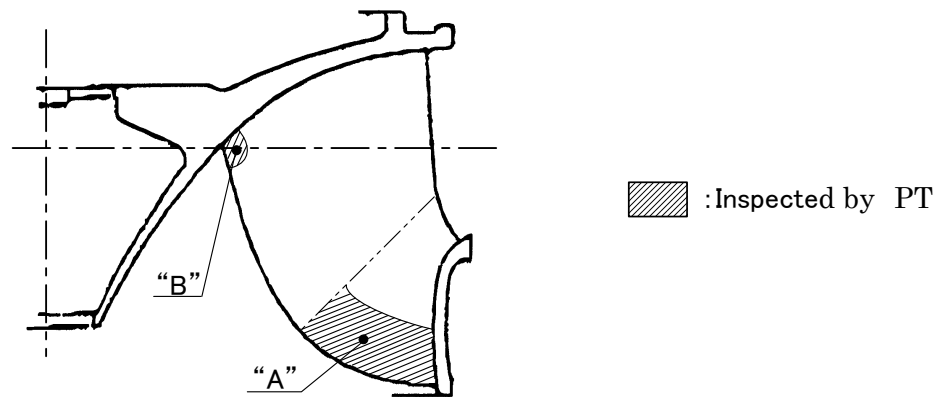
Area of Inspection by Penetrant Test (PT)
